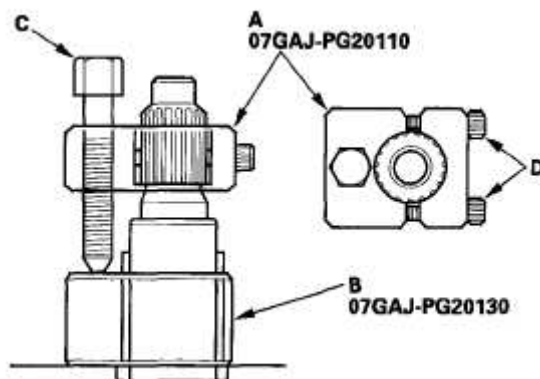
Identifying Mainshaft Holder And Mainshaft Base
